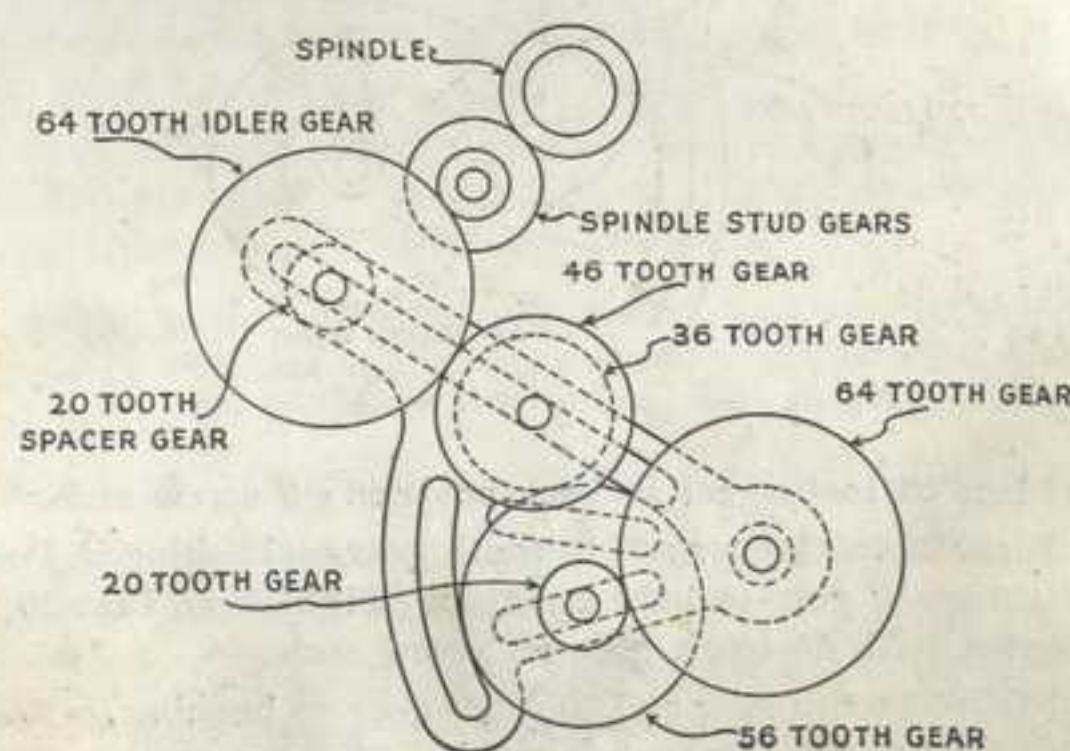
Gear set-up for .0087 inch carriage feed (see page 32).
